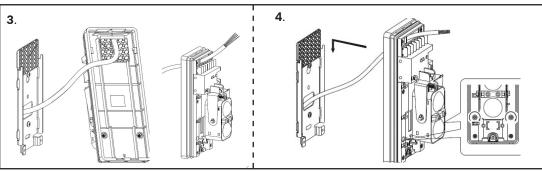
Inserting the wire and fastening the mounting plate to the sensor.
